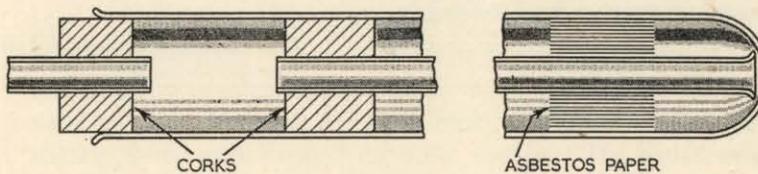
TUBES ASSEMBLED FOR MAKING A RING SEAL
